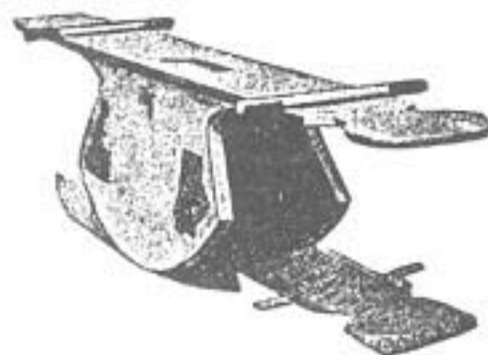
How to make the wing eccentrics, pedals, steering wheel, and rear U-frame.
